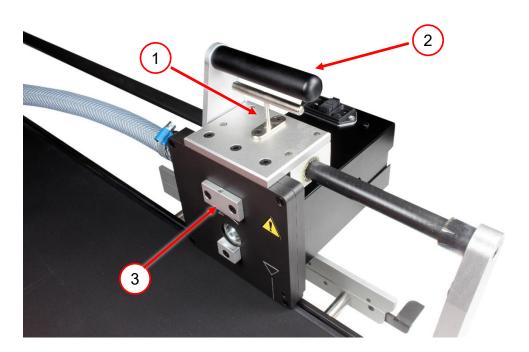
Fitting the VARGA VA 1 lifting handle and handle
